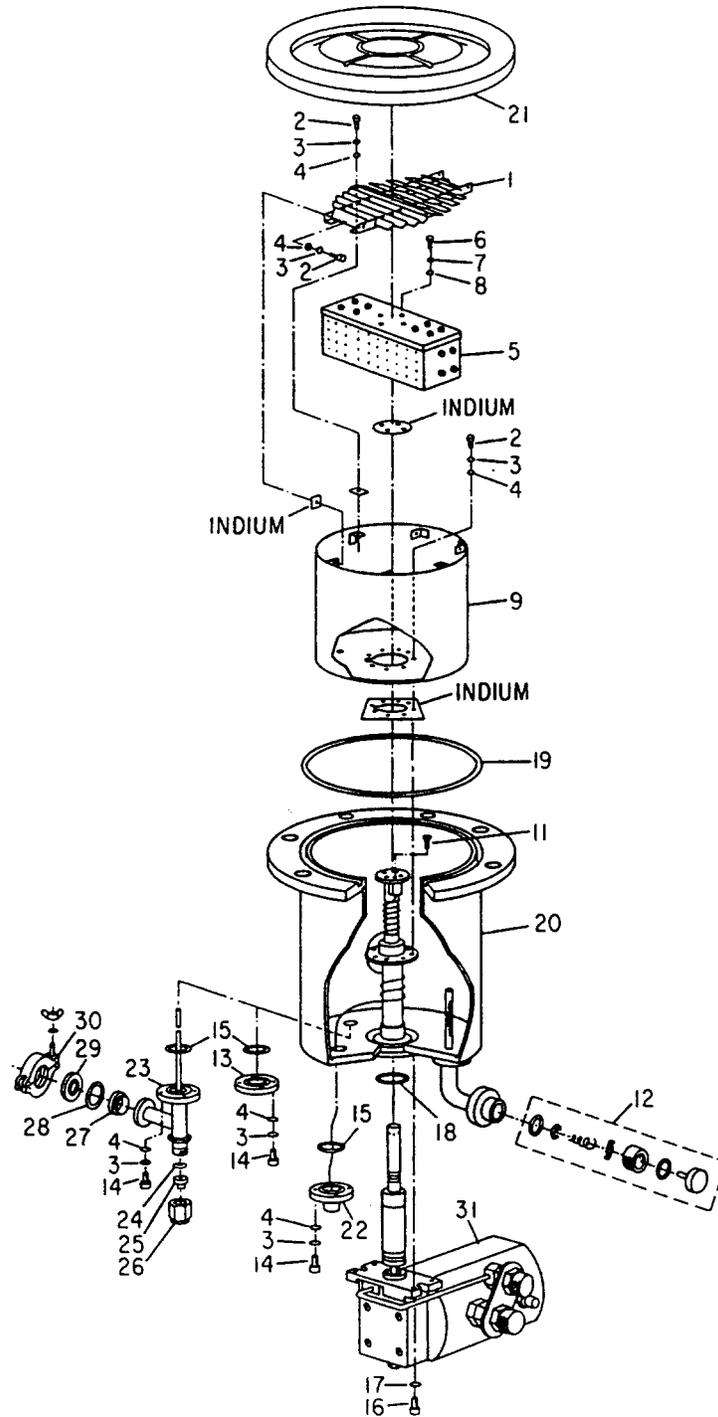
Exploded View of Cryo-Torr 100 Cryopump
